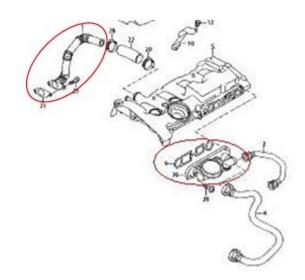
The crankcase ventilation pressure regulating valve and turbo intake pipe is circled here.
